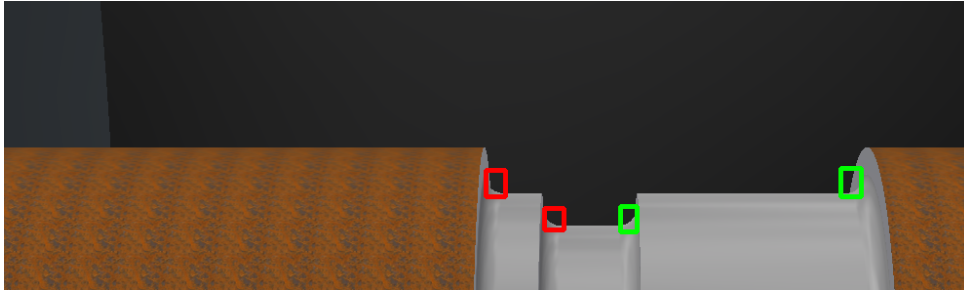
Drill-pipe 5. Detected weld start and stops for multiple grooves
